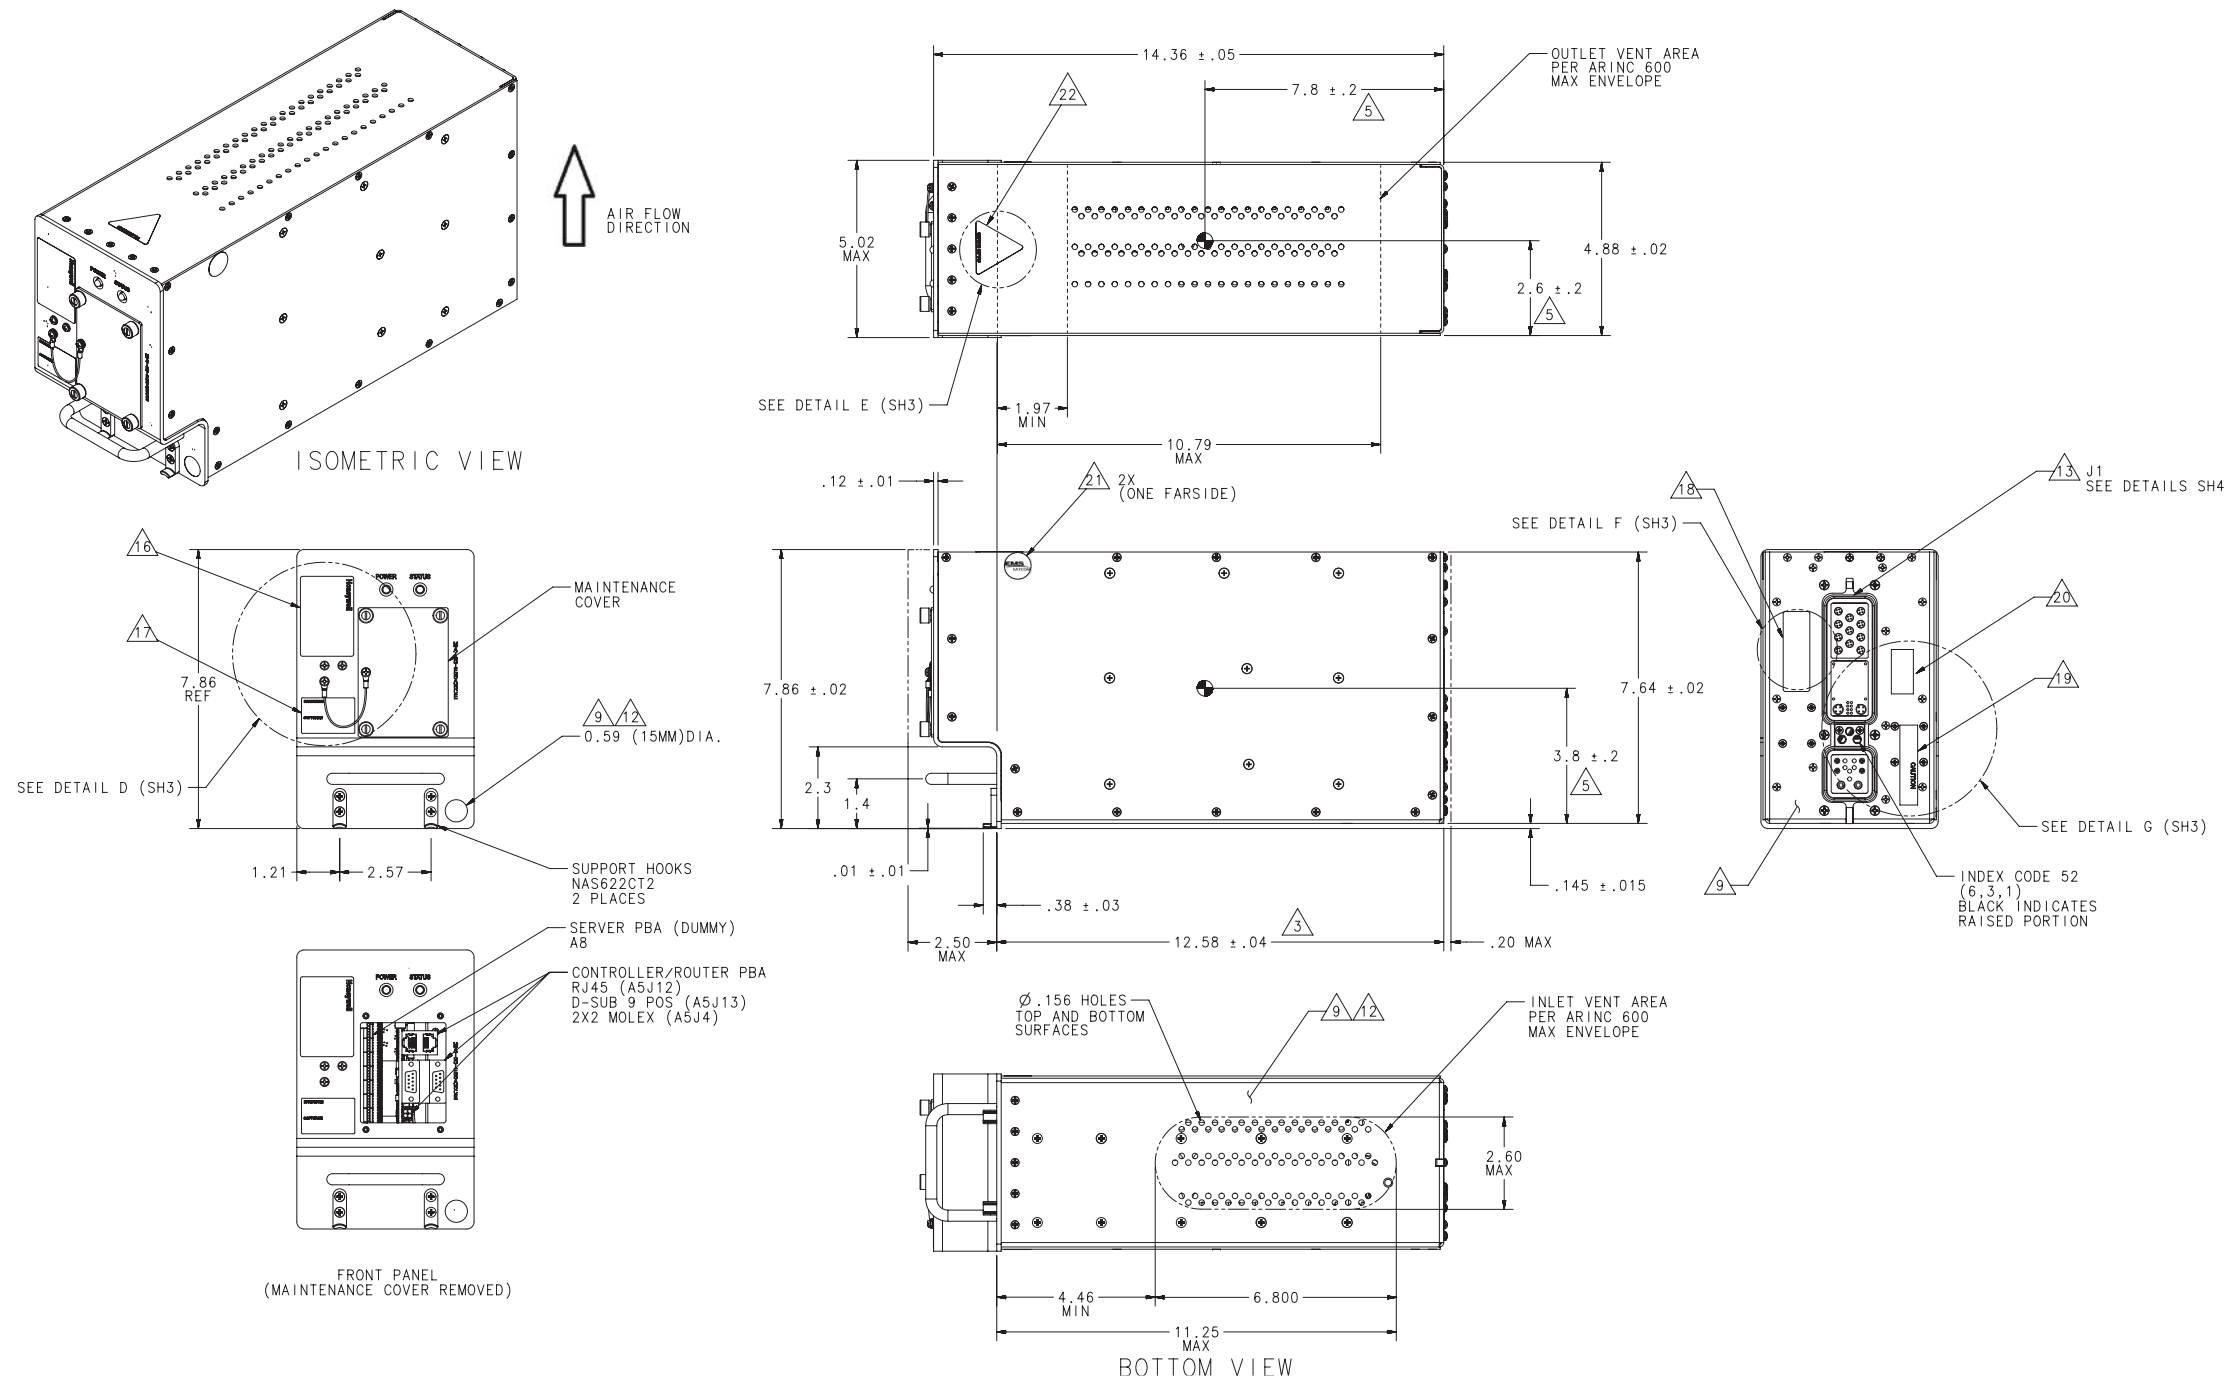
Modman Outline and Installation Drawing (Sheet 2 of 4)
